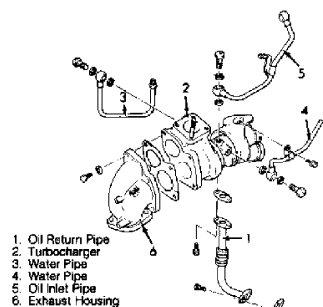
Exploded View of Turbocharger Assembly (Eclipse & Galant 2.0L Shown; Stealth & 3000GT Similar)
